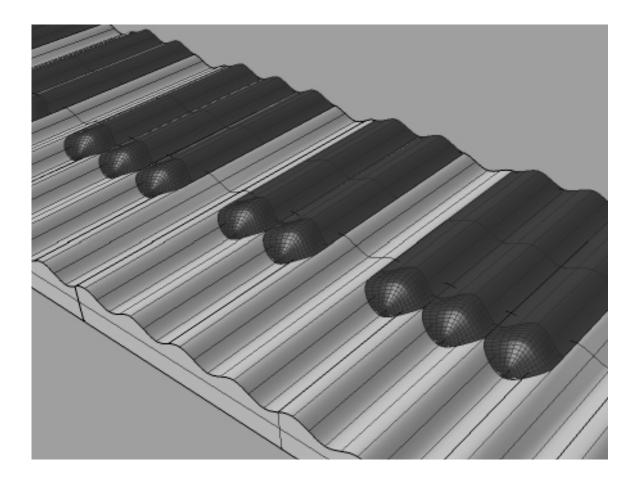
Seaboard 1 keywave CAD drawing (right perspective) April - July 2009
